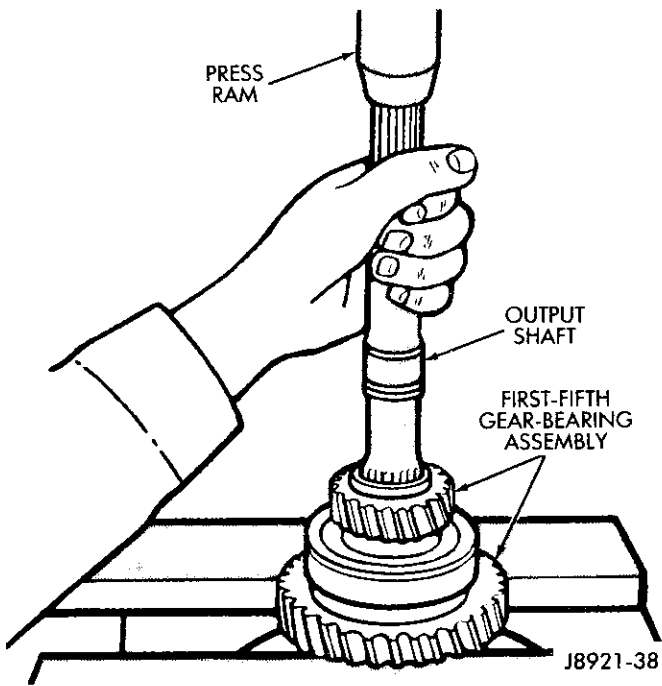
Removing Fifth Gear And First Gear Bearing And Race
